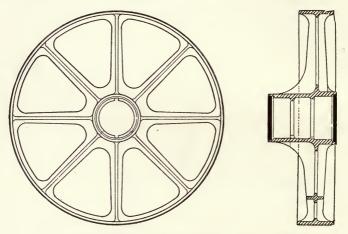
Spoke Type Cast-Steel Front Wheel.
